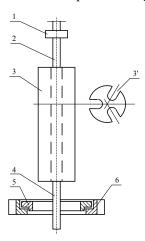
Suspension of motor SAR-55/1500/09 in drive system for polymerization reactor, where: 1 is upper bearing, 2 is upper ending of motor shaft, 3 is rotor, 4 is lower ending of motor shaft, 5 is the slide ring of lower bearing, 6 is swing part of lower bearing
